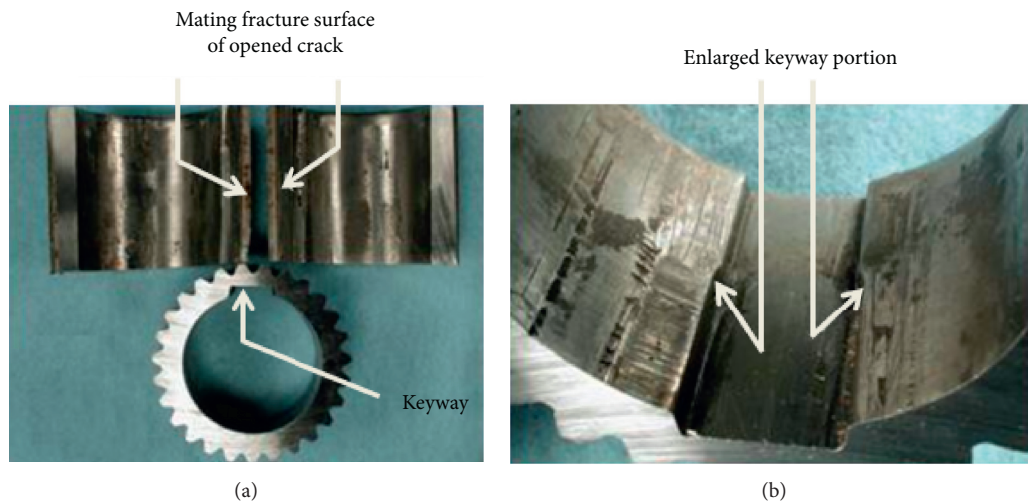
(a) Overview of longitudinal mode crack surface and the cross-sectional view of keyway at the nonfailed portion. (b) Enlarged keyway portion of gear.
